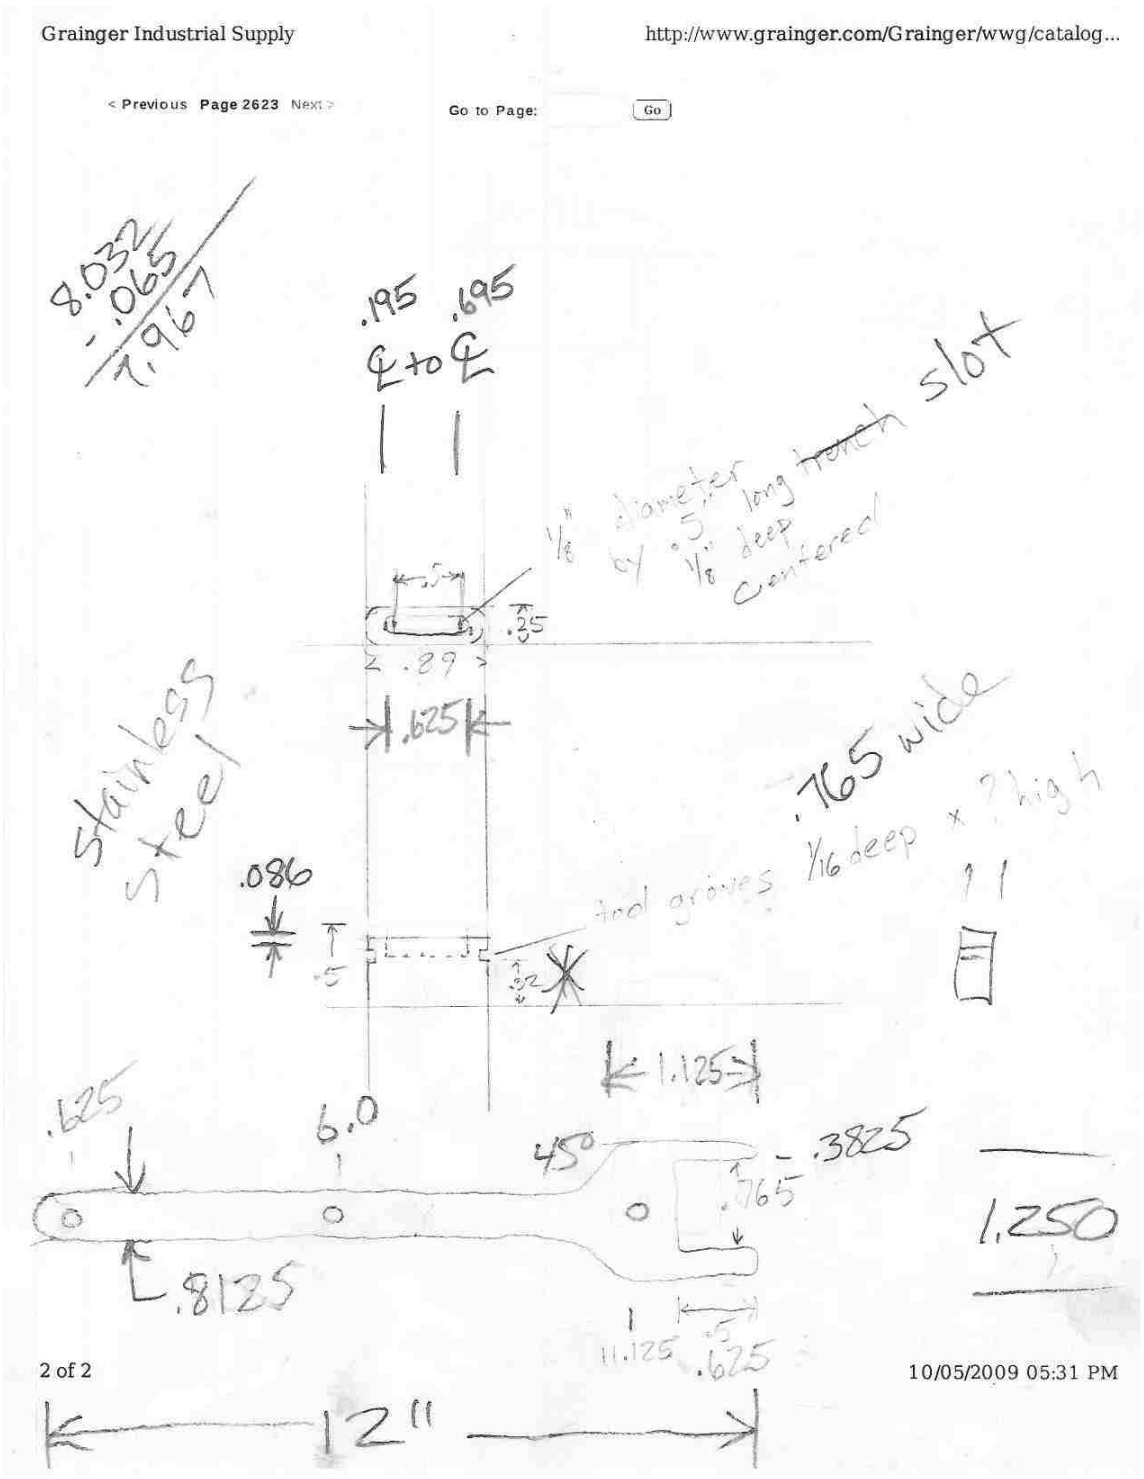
The sample holder (top), constructed from stainless steel. There are 2 versions of the sample holder. The 1st is for bulk samples, and the 2nd is machined to take Tzero Sample pans. The fork/wrench (bottom). The fork end is for inserting the sample holder into the heater block, and the wrench end is for loosening the nuts which fasten the glass viewport to the main sample chamber. Parts machined by B. A. Burkeen in the University of Missouri – St. Louis’s Machine Shop.
